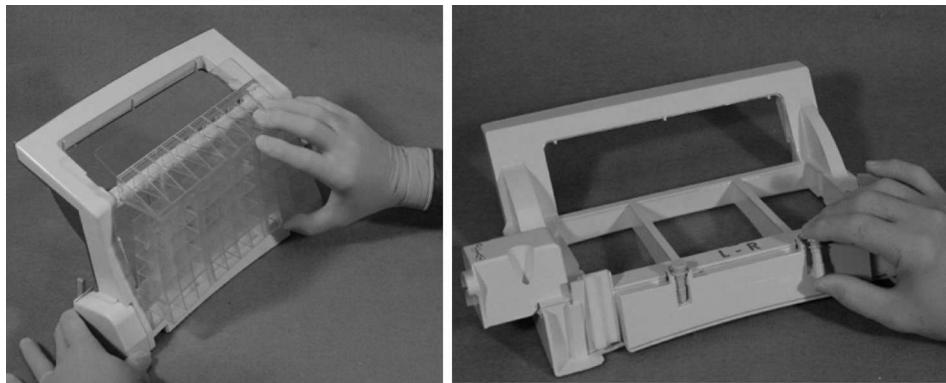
Left: Inserting grid plate. Right: Attaching two sealed fiducial assemblies.
